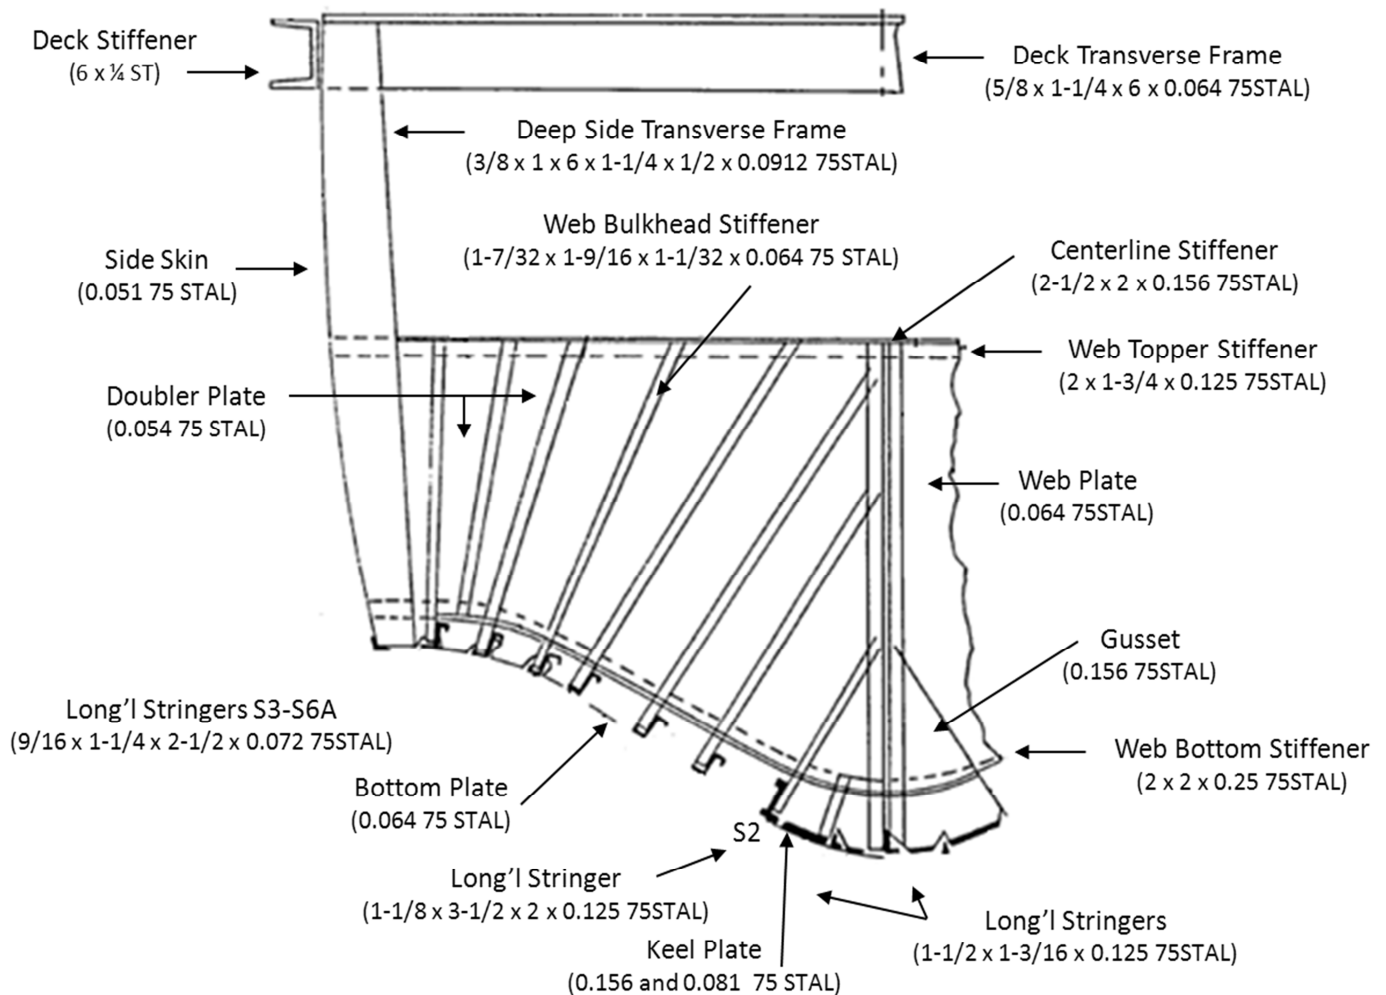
Structural drawing of floor frame 328 (Martin 1955).
